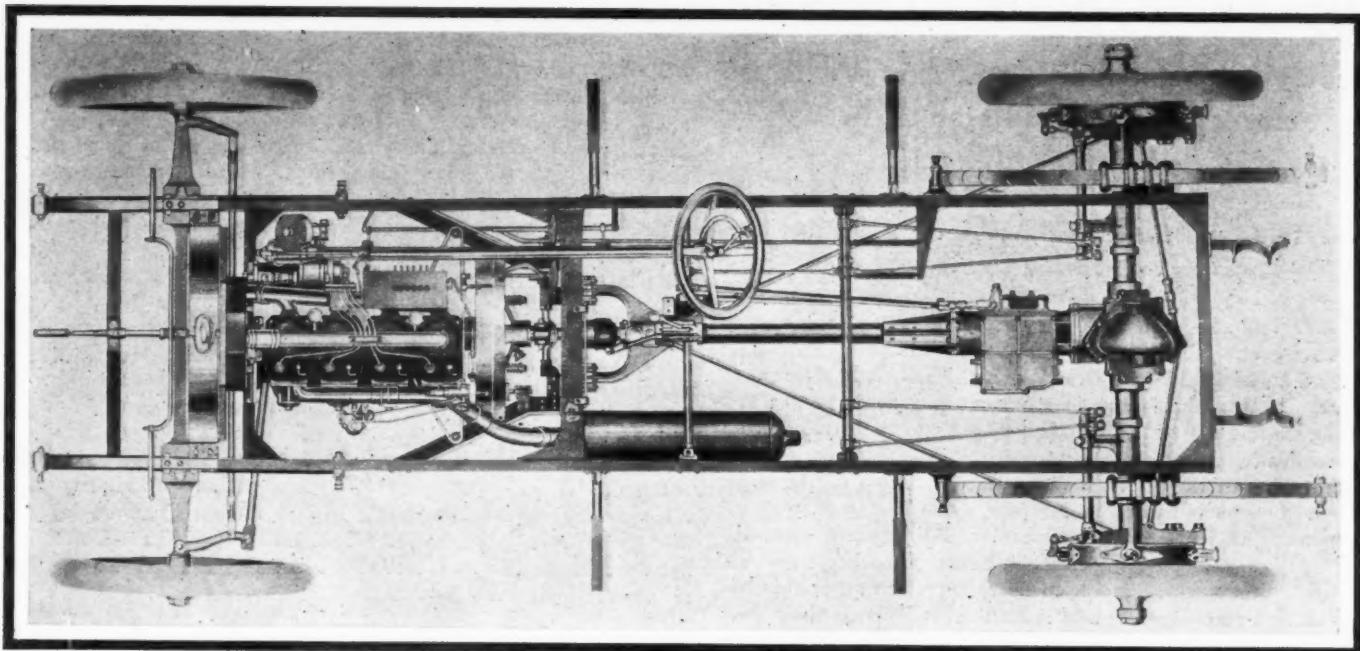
Plan view of chassis of model 69 of the 1913 Overland line, showing location of gearbox
